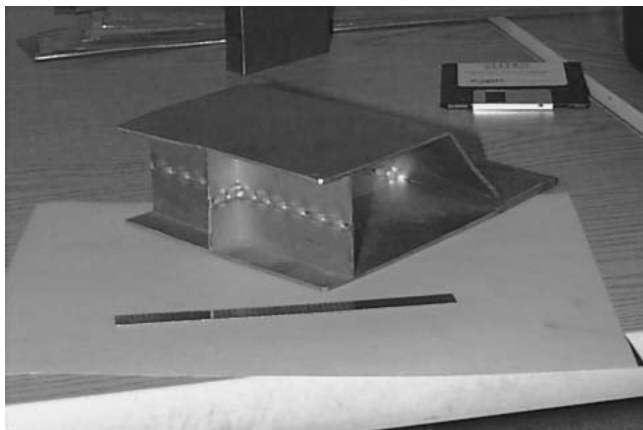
McDonnell Douglas' SPF/DB process using welded core. This is a testpiece that has been formed and diffusion bonded.
